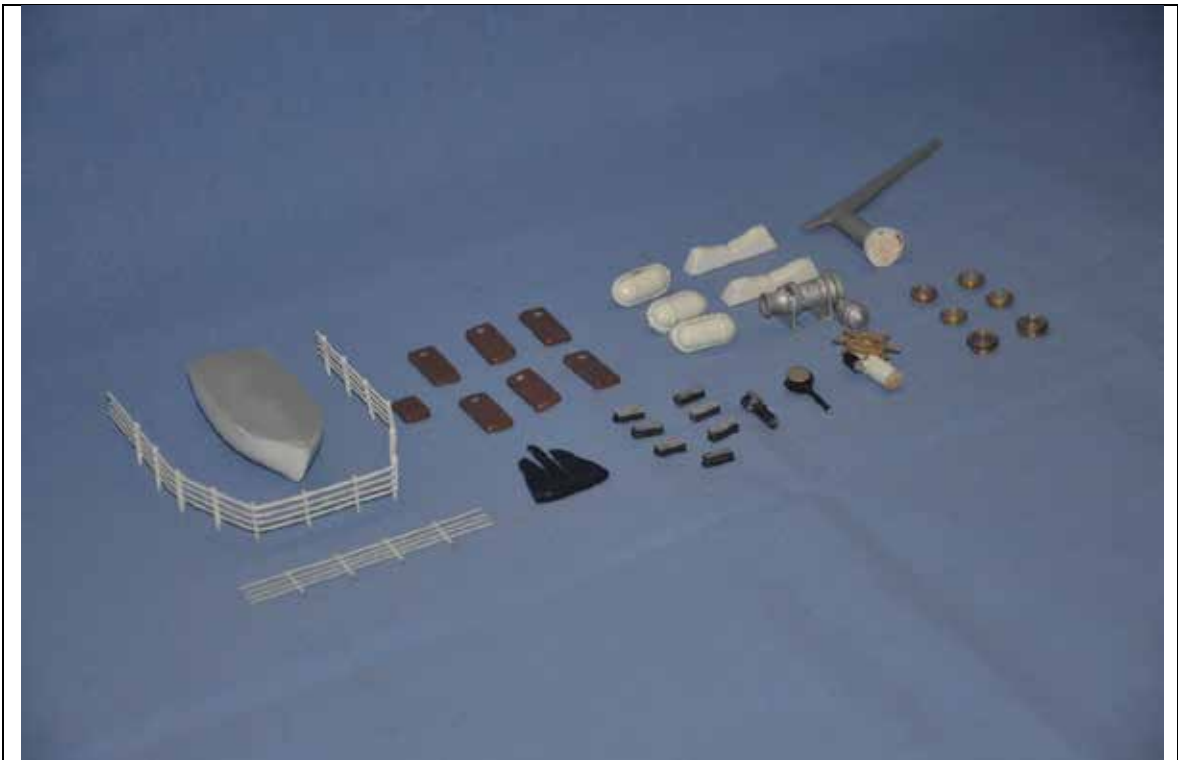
Guard Rails and Fittings Cleaned/Painted ready for fitting
